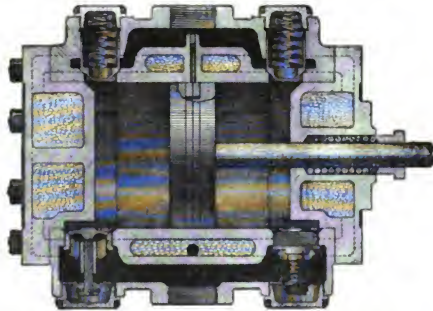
INGERSOLL-SERGEANT AIR COMPRESSOR CYLINDER.
